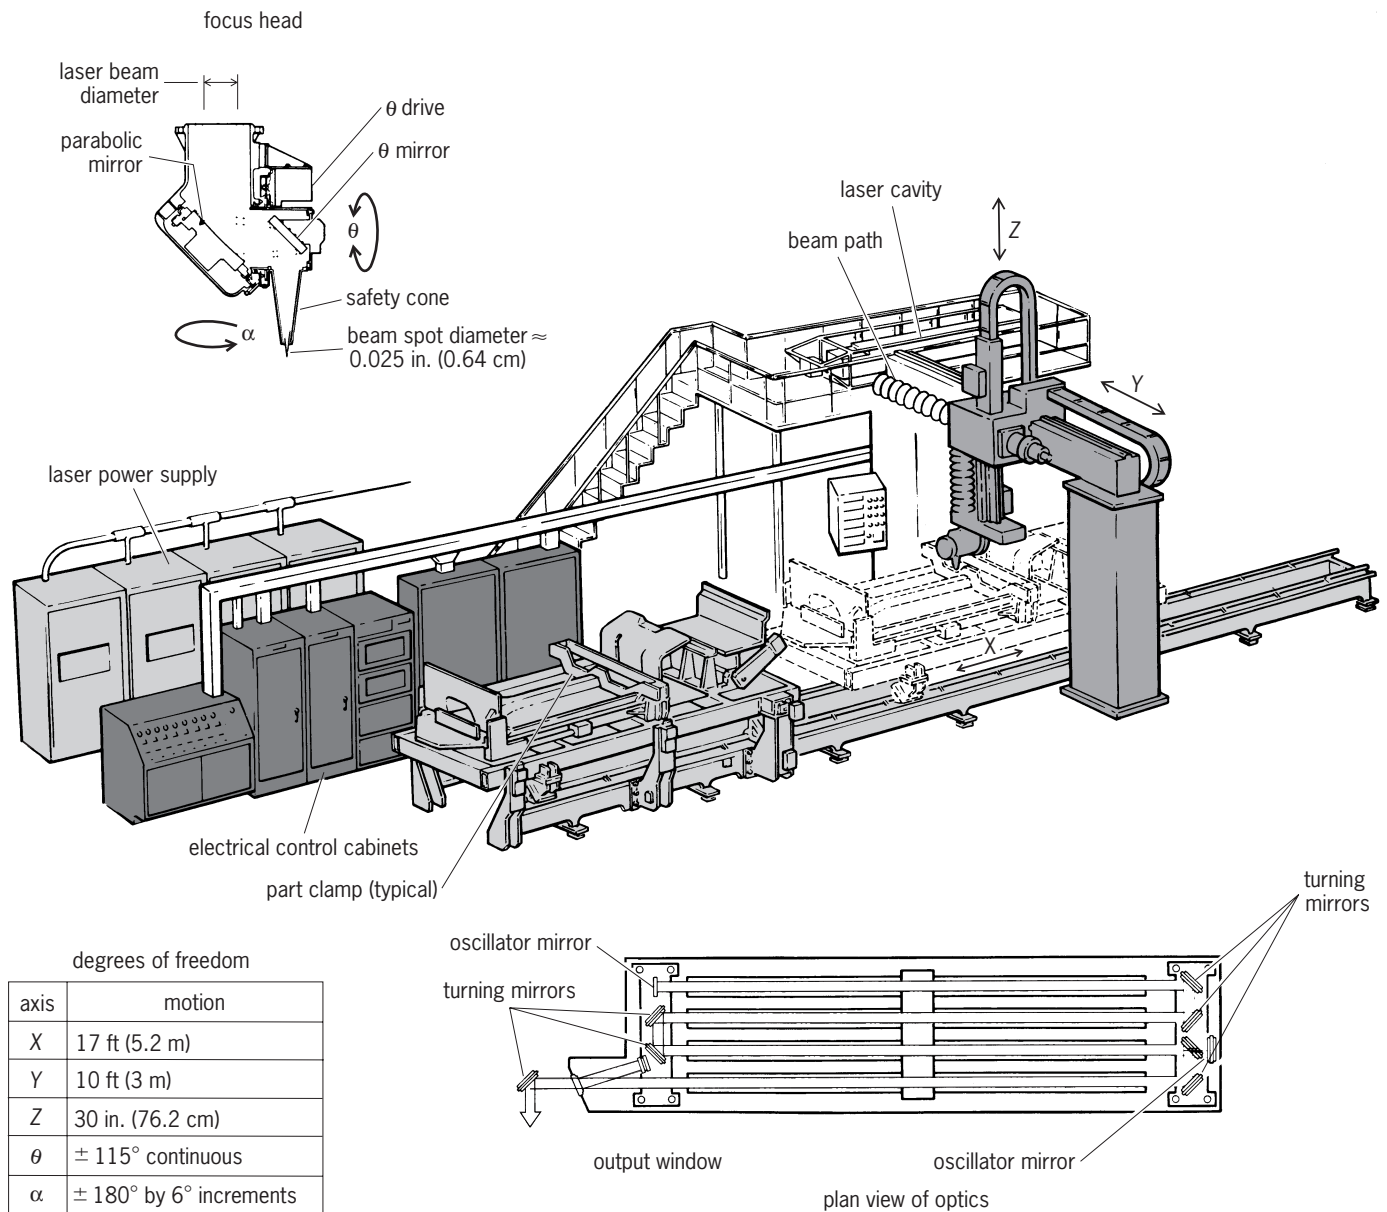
Schematic diagram of 6-kW multiaxis laser welding system at Ford Motor Company; arrows indicate direction of motion along various axes. This is the first complete high-power laser welding system designed to perform a high-production-rate industrial fabrication operation. (Hamilton Standard Division, United Technologies Corp.)
